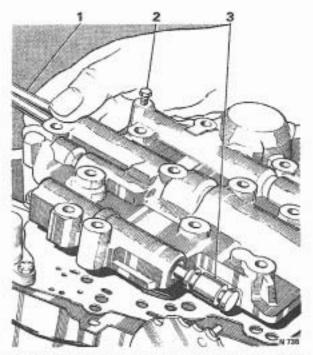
REMOVING THE CONTROL VALVE UNIT
